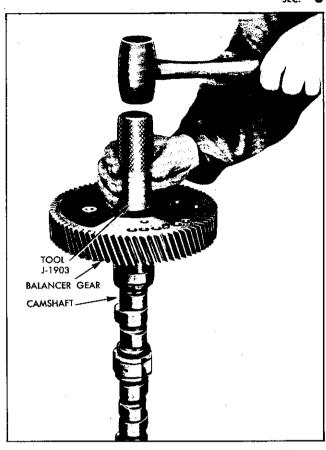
Replacing Balancer Gears (Camshaft or Balancer Shaft) with Tool J-1903.
